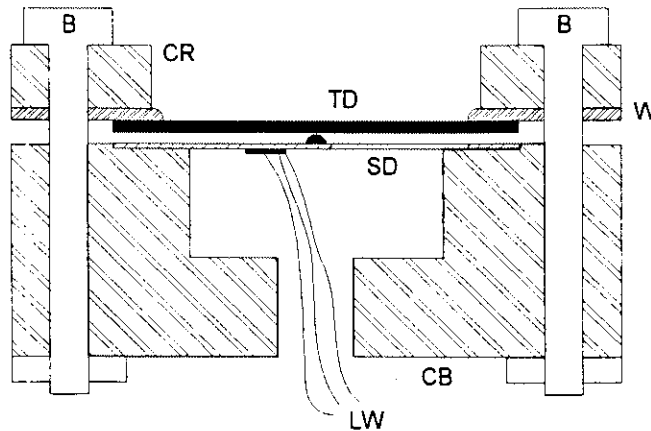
Schematic representation of test assembly showing bolts, B, compression ring, CR, washer, W, test disc, TD, sensor disc, SD, compression block, CB and strain gauge lead wires, LW.
